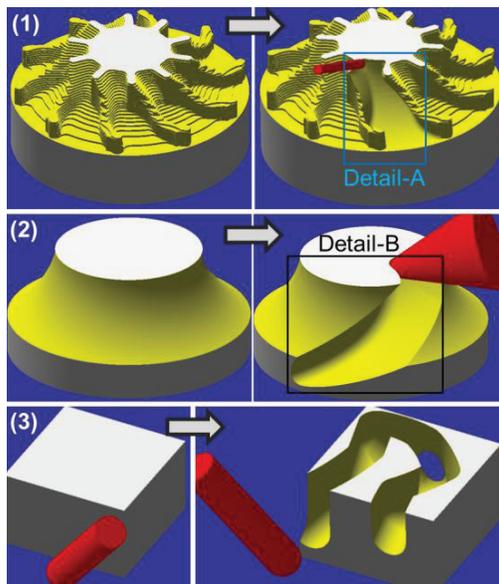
Parts machined by ball-end and tapered ball-end mills
